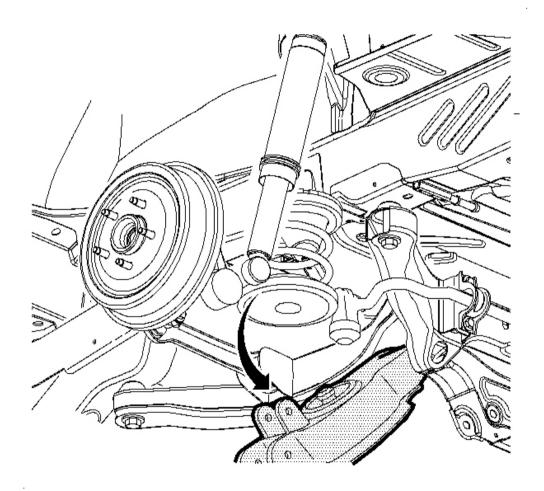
Control Arm & Coil Spring Courtesy of GENERAL MOTORS CORP.
